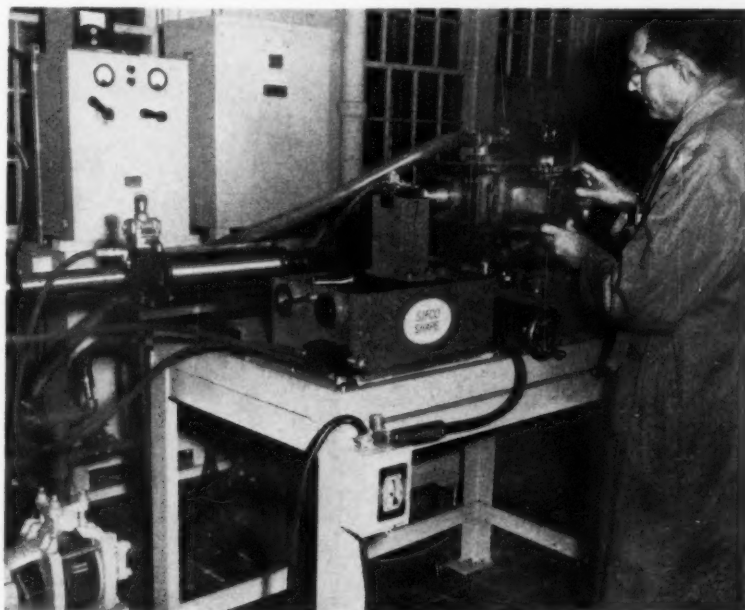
Production electroshaping of precision turbine blades. Operator is shown loading one of the smaller "Sifco-Shape" machines with a forged blade. The blade is held in a special fixture which is inserted into the machine's plastics-walled shaping chamber
